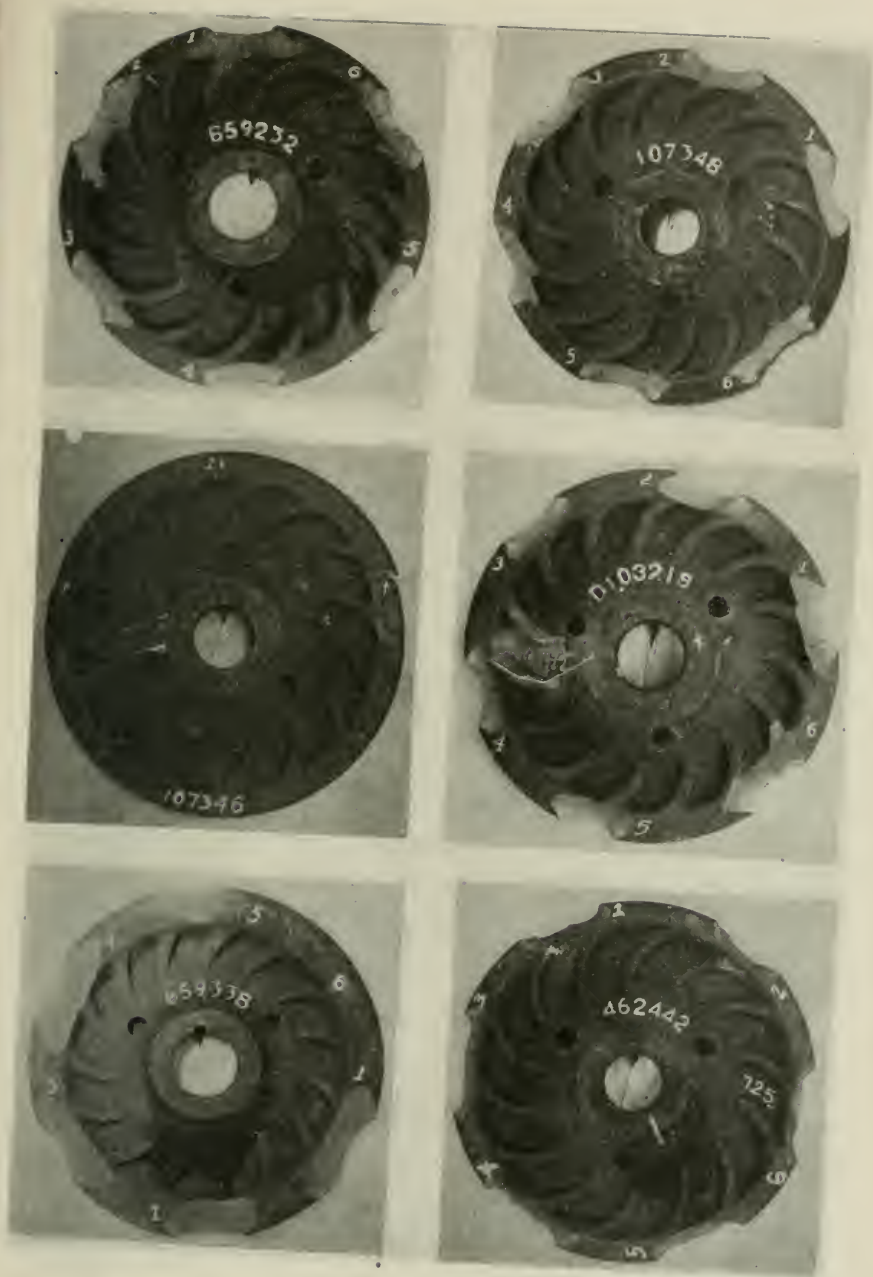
INNER FACES OF WHEELS NOS. 659 232, 107 348, 107 346, 103 219, 659 338, AND 462 442 AFTER FRACTURE OF FLANGE
